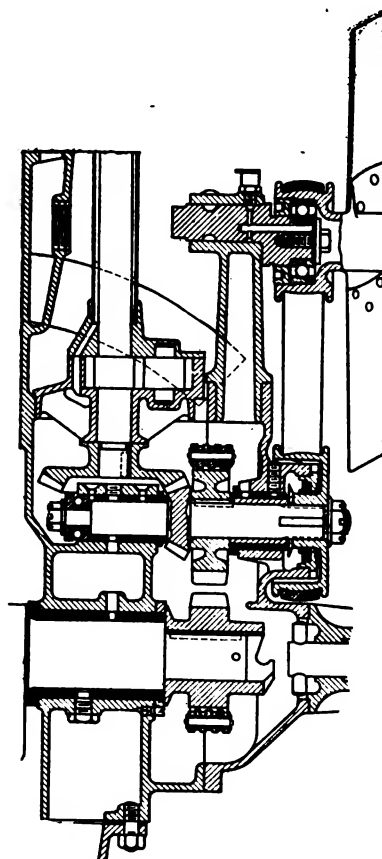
OVERHEAD CAMSHAFT DRIVE ON THE WOLSELEY ENGINE
